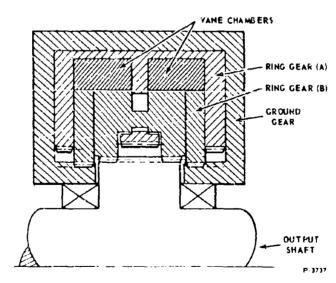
Internal Mesh Balance Configuration (Both Gears Working)
